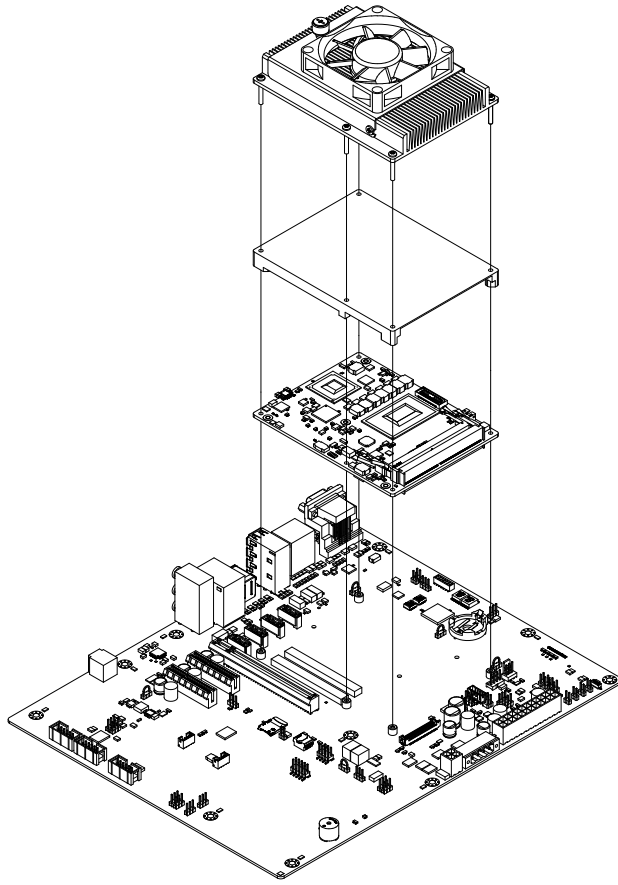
Assembly Drawing - COM Express to SOM-DB5830
